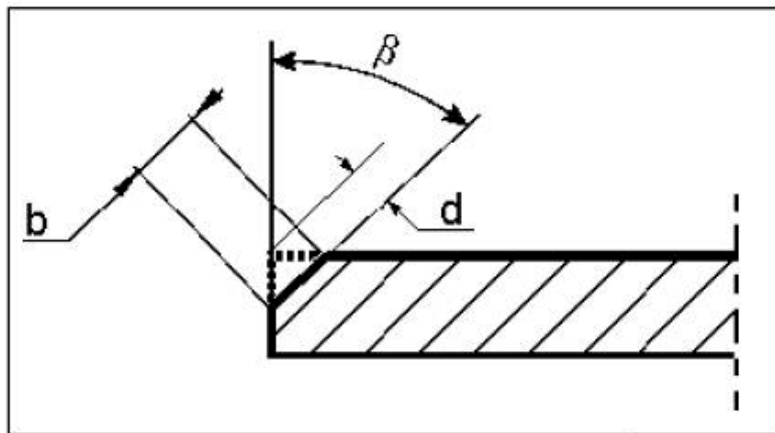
Reference drawing showing Bevel Angle (β), Bevel Face Width (b) and Bevel Depth (d).
